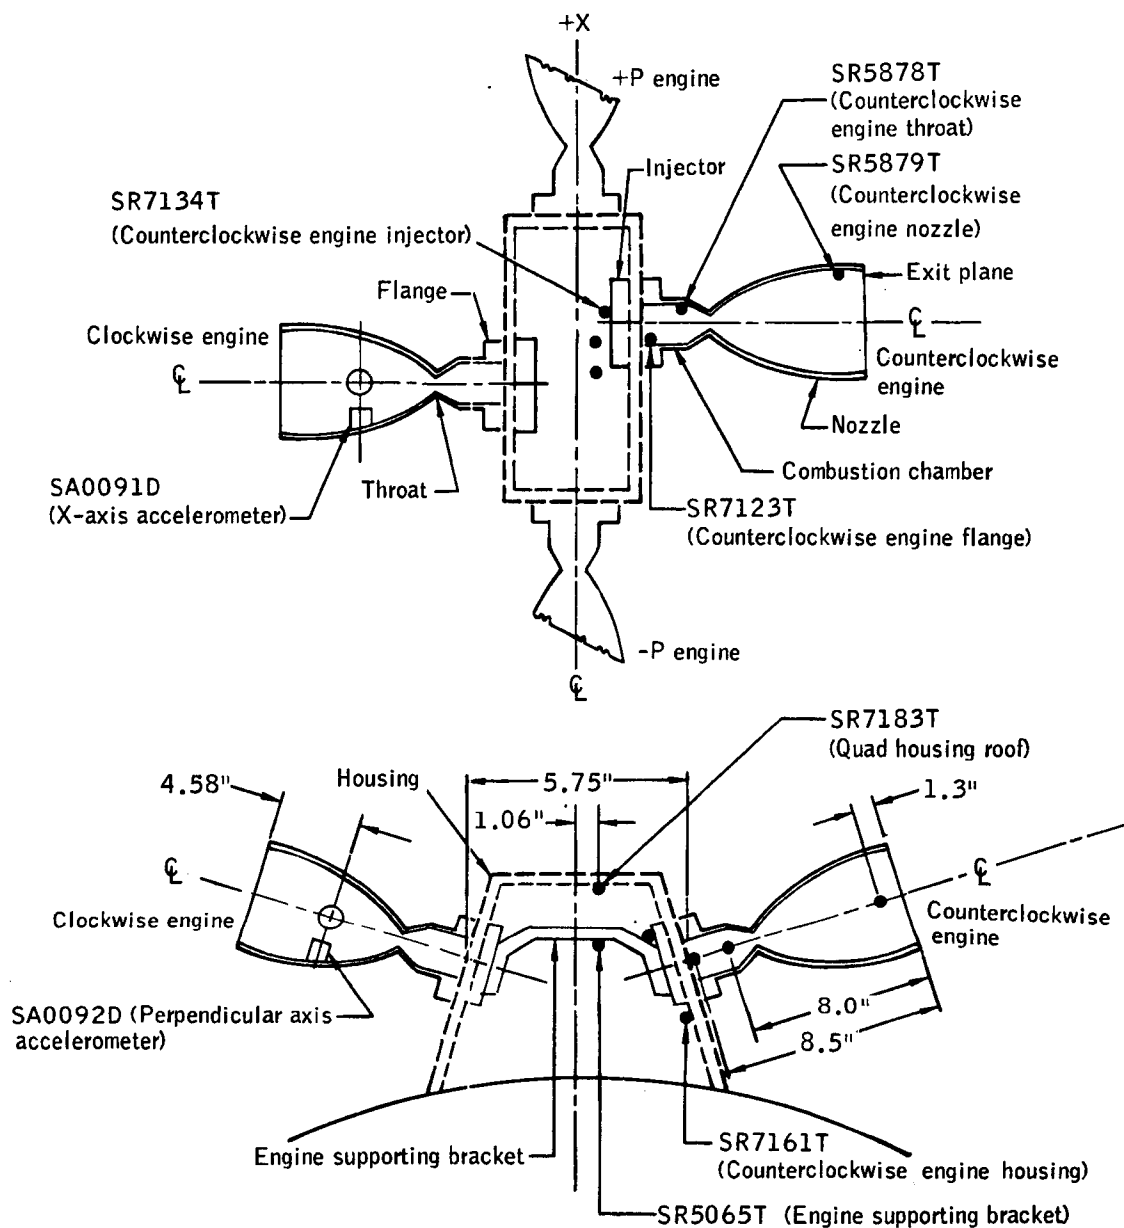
Service module RCS package instrumentation locations for clockwise and counterclockwise roll engines, engine supporting bracket, and quad housing roof on BP-15 spacecraft.
